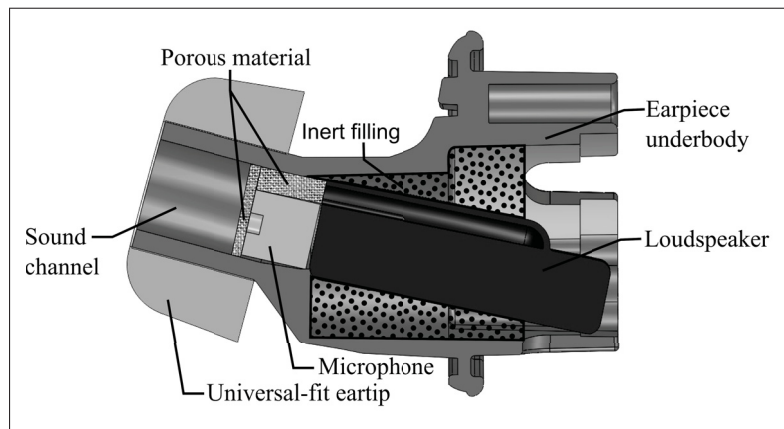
Cross-sectional view of the universal-fit earpiece
